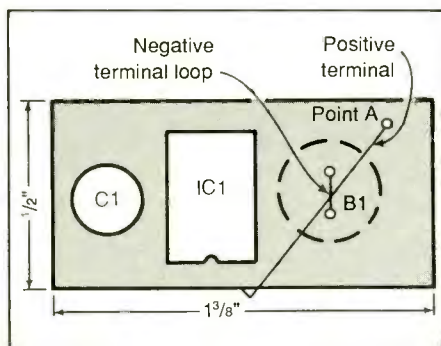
Assembly details for project, which mounts on and is wired to a small perforated board.
